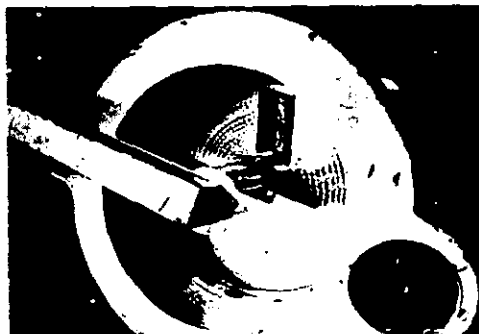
SHORT GOODS MACARONI DIE EQUIPPED WITH ROTATING KNIFE
